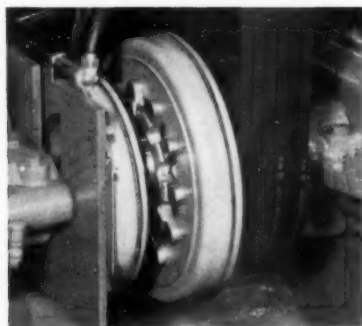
Compact Warner clutch-brake, with integral five-groove V-belt sheave, meets tight space requirement. Complete assembly fits between bearings 13" apart.
